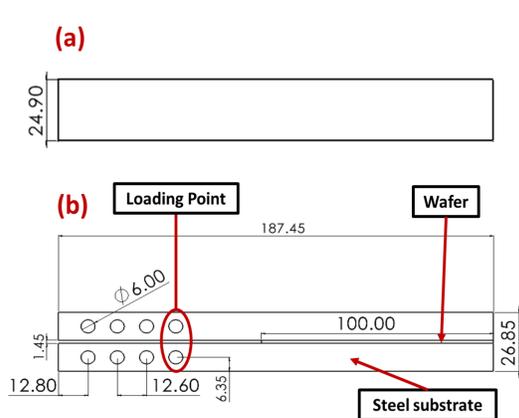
DCB joint geometry. (a) Top view and (b) Lateral view.
